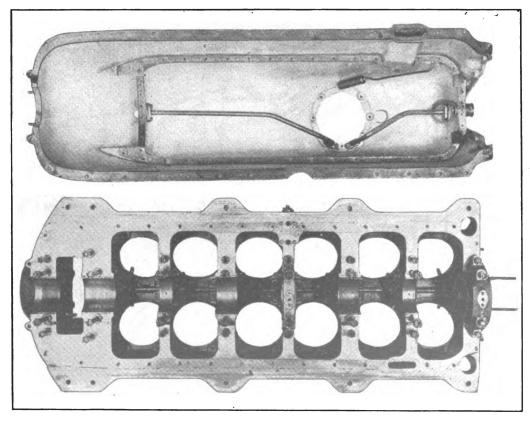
Crankcase ,upper and lower halves, inside view.
